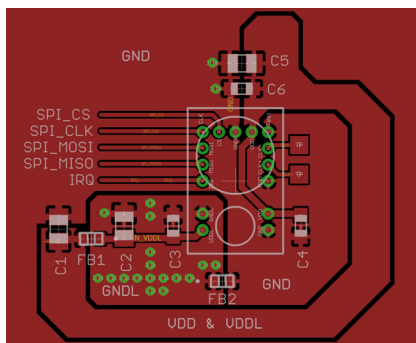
Application Layout (the Top Layer of a 2-layer PCB Design)
